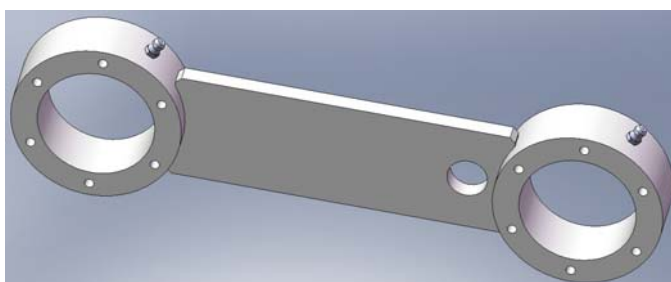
connecting rod, weight: approx. 2,4kg
